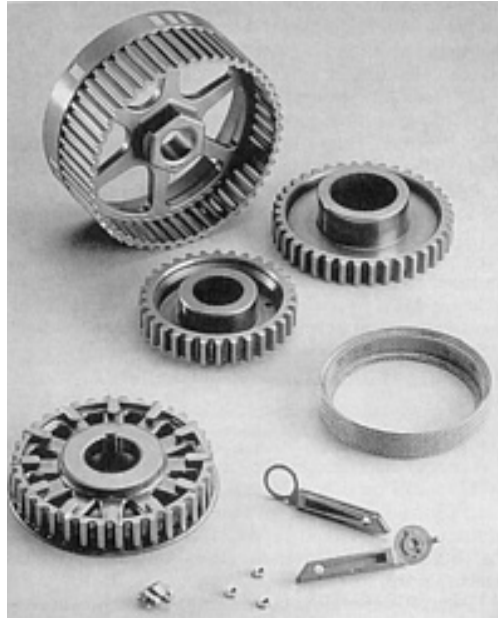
1996 Awards of Distinction winners. Left to right, front row: palate expander assembly, polarizing keys, hole punch. Second row, flange pulley and filter. Third row: transmission sprockets. Back: camshaft sprocket. Courtesy of MPIF
